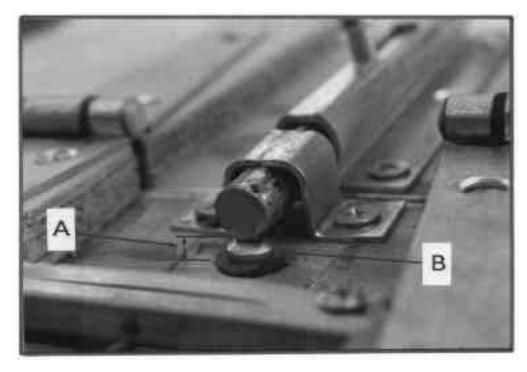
Adjusting screw and washer used to remove play between the barrel bolt and its strap, which will stiffen the two halves when unfolded. (A) Measure the distance between the bolt and the board. (B) Insert a round-headed sheet metal screw with enough washers to make the bolt fit firmly under the flange. Sheet metal screws are preferred because of their hardness. Pound the flange down if necessary.
